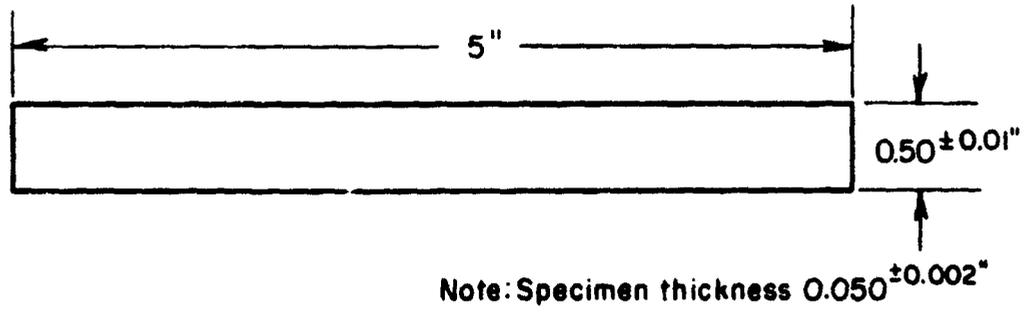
SHEET STRESS-CORROSION SPECIMEN
